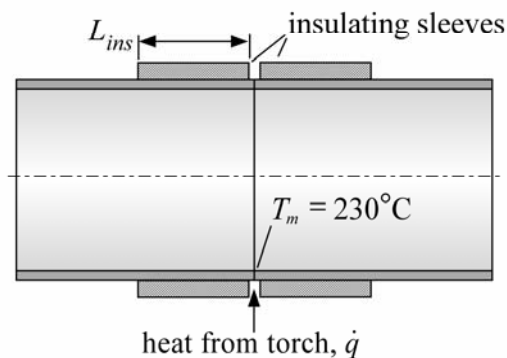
Tubes with insulating sleeves placed over them to reduce the heat transfer required.
